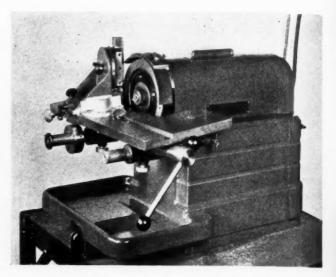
Front View of Ex-Cell-O Machine Shown in Fig. 1, as Equipped for Grinding "Chip Curler" Groove
